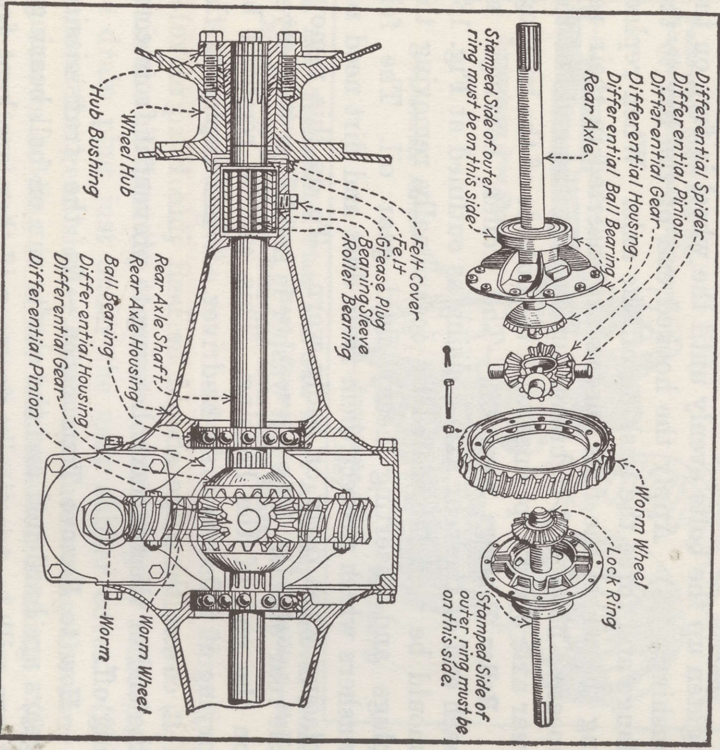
Phantom View of Fordson Tractor Axle at A Showing Ball Bearings Used for Supporting Worm Driving Gears and Differential Assembly and Roller Bearing at Wheel End of Axle. At B the Parts of the Differential Mechanism are Shown as They Appear When This Assembly Is Removed from the Axle.
